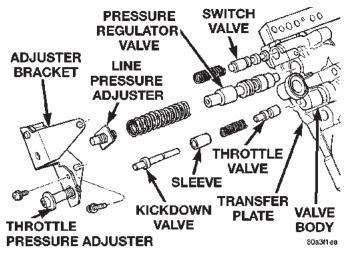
Adjusting Screw Bracket, Springs, Valve Removal
